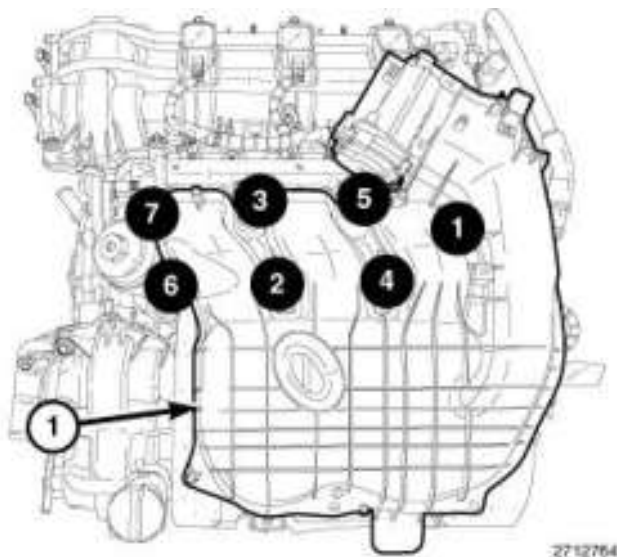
Upper Intake Manifold Bolt Tightening Sequence
